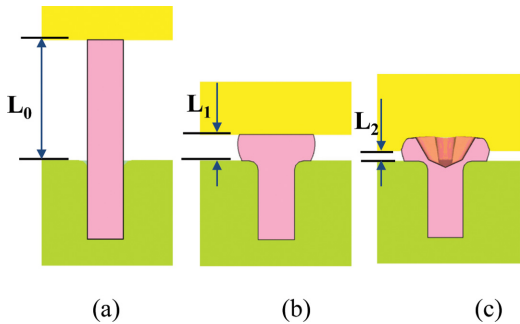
Configuration of the two-step head forging processes: (a) The initial billet, (b) The intermediate preform, (c) The final product
